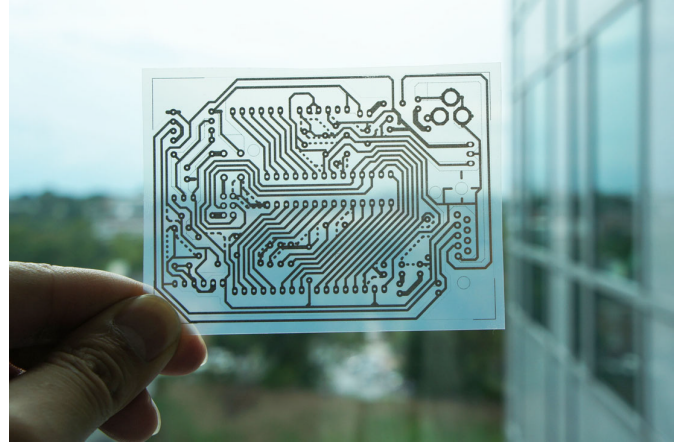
PCB printed using self sintering silver inkjet ink [25].
